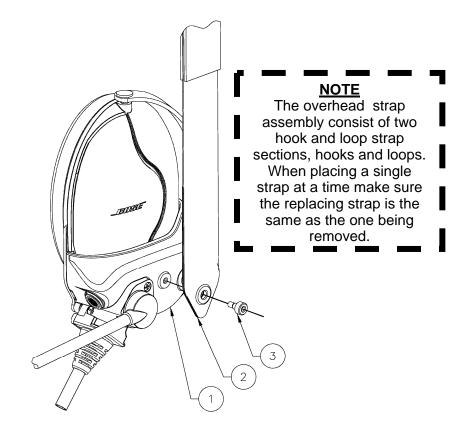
Overhead Strap Assembly Removal and Replacement
